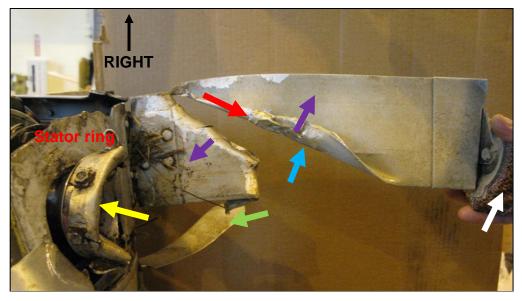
The fractured stator 1 identified in Figures 11 and 15.
